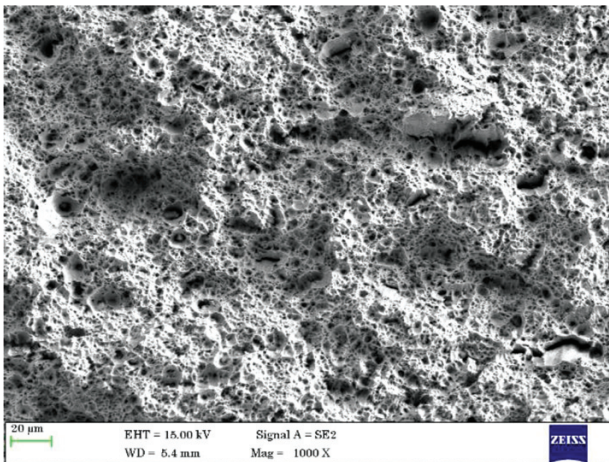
Fracture surface of the AISI 409 FSS tube after LBW with a welding speed of 2.3 m/min and focal distance of 18 mm
